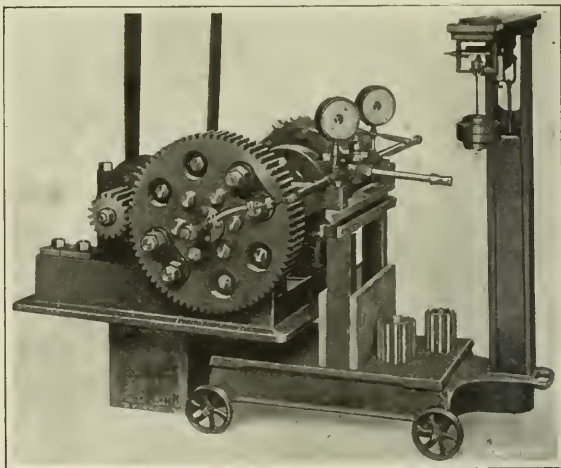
Improved Gear Testing Machine built for University of Illinois
